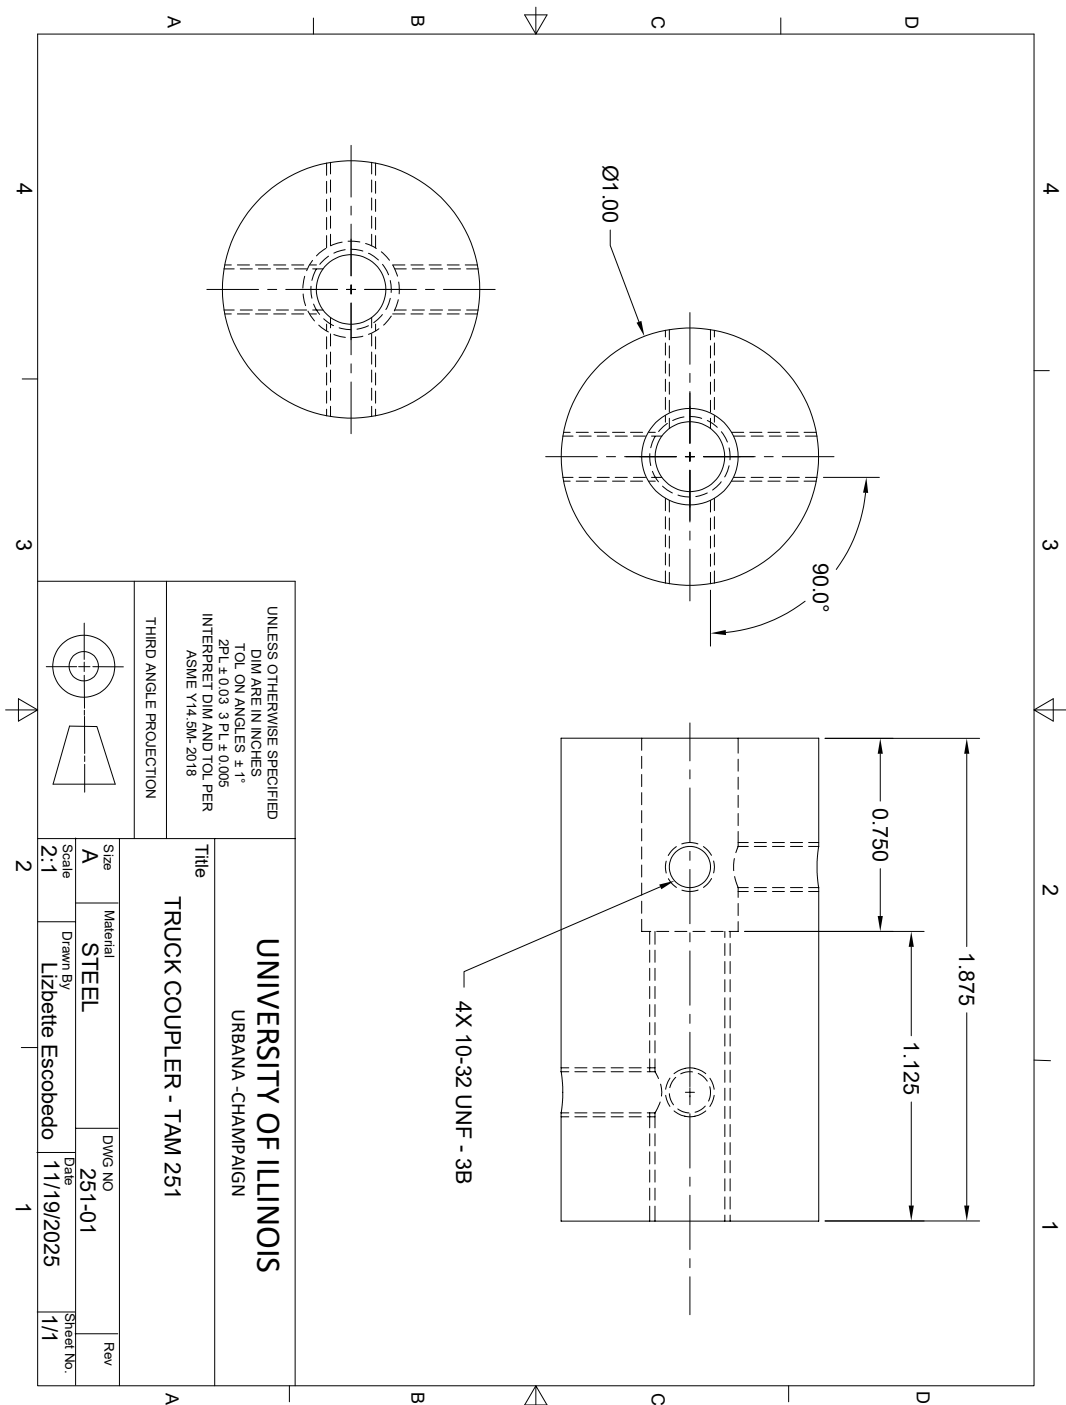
Dynamics Demonstration: Truck Coupler Drawing
